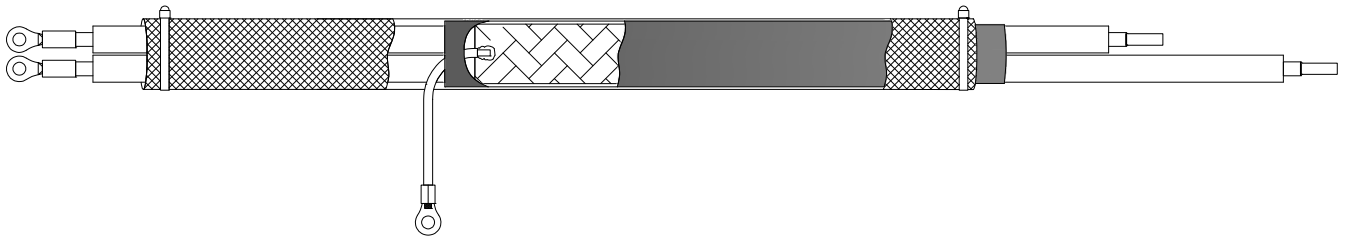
VL4000 BeamWash Lamp Socket Cable Assembly
